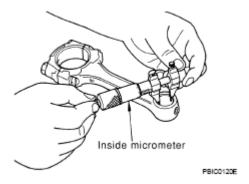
Measuring Inner Diameter Of Connecting Rod Bushing With Inside Micrometer Courtesy of NISSAN MOTOR CO., U.S.A.
